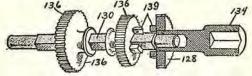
Transmission square drive shaft (130) and sliding gears (136).
